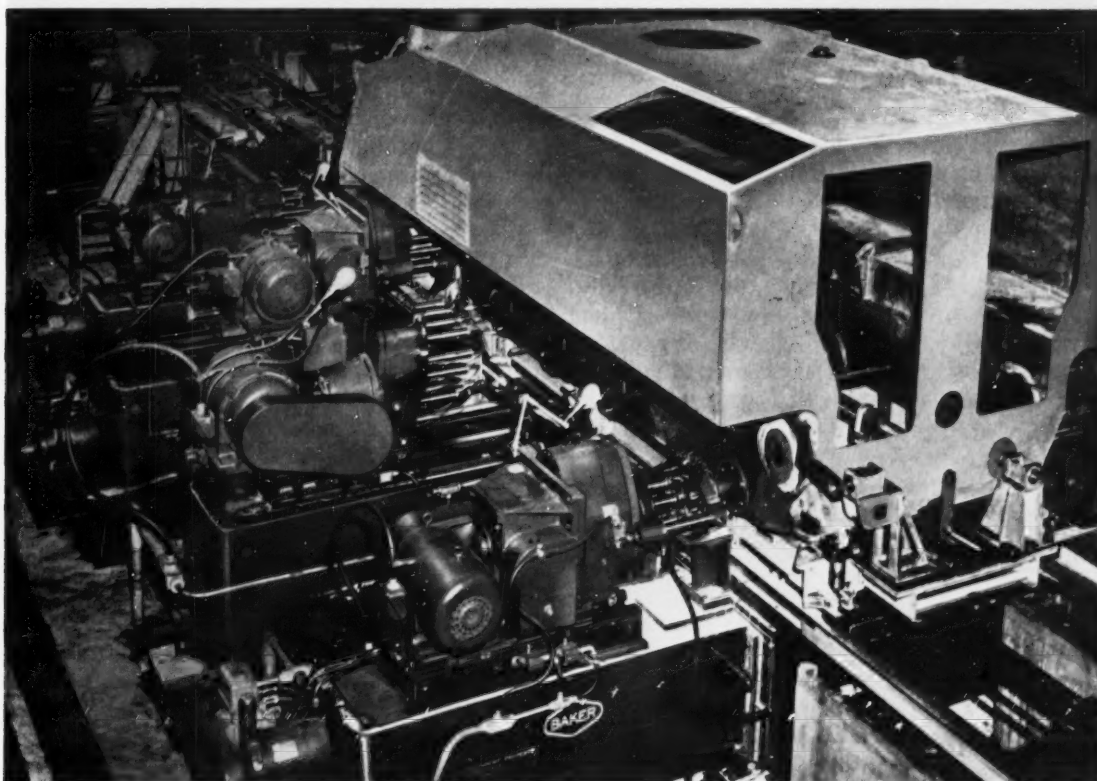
Opposing heads of transfer machine are built as a three-piece, two-way machine with end beds and a tying center bed.
